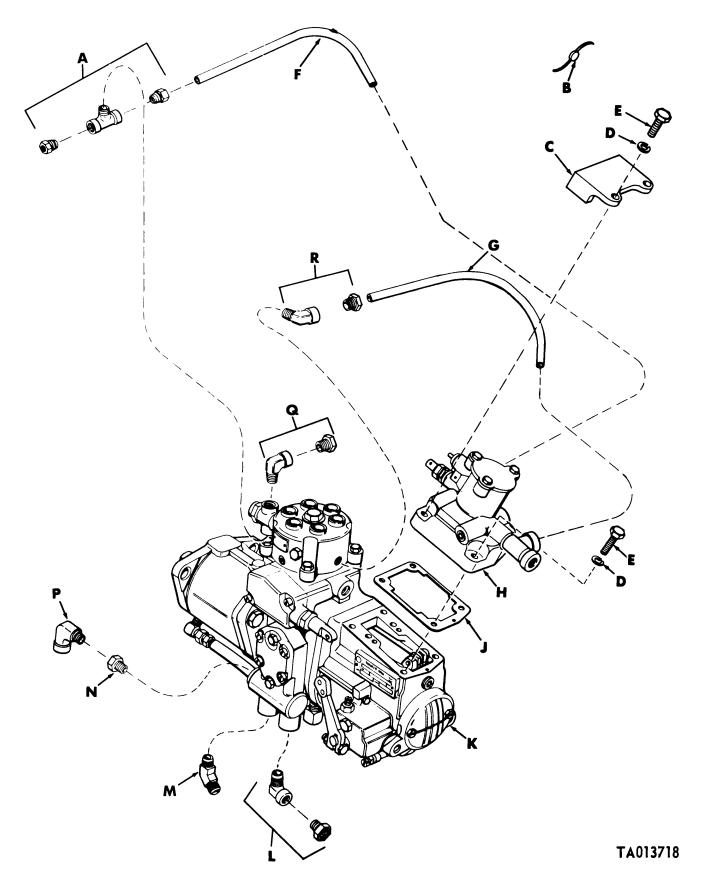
Code A fuel injection pump assembly, partial exploded view.
